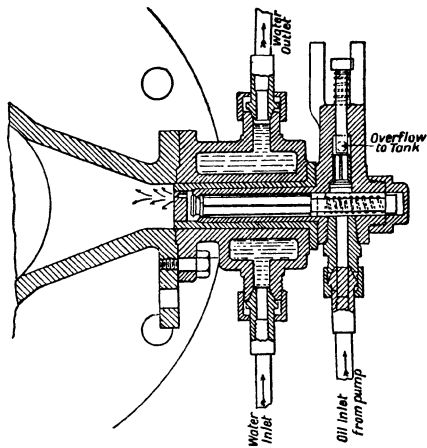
Hornsby-Akroyd Oil-inlet Valve Box
